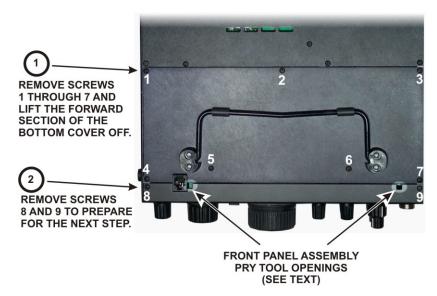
Removing Bottom Cover and Front Panel Assembly Screws.
